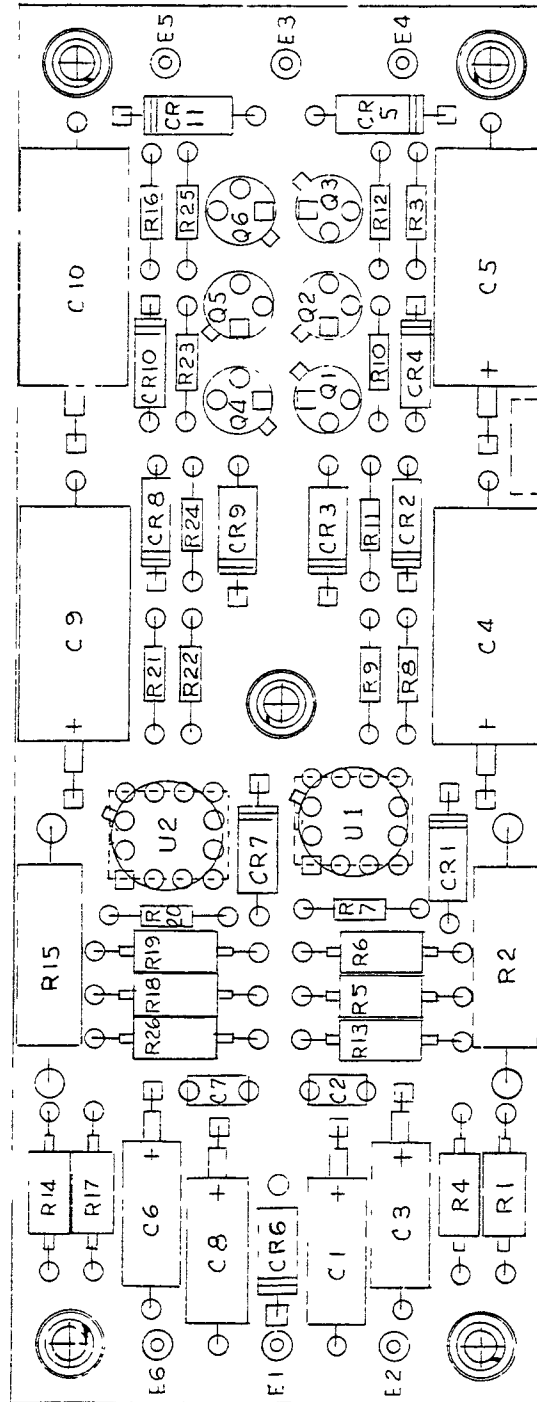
A1 Printed Wiring Board Parts Location Diagram
